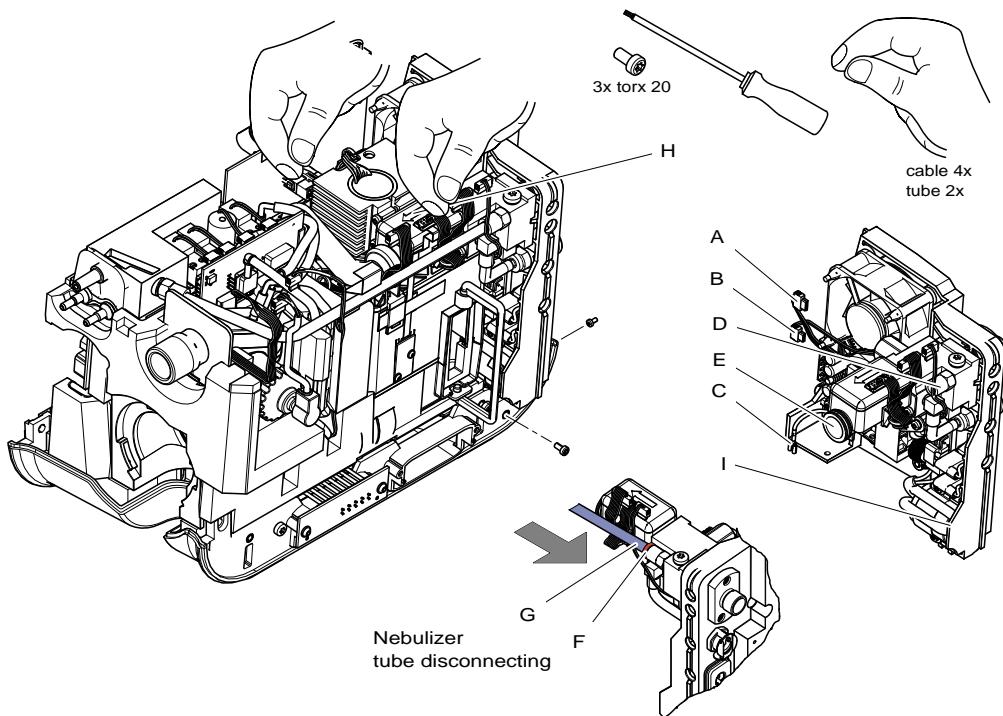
Fan, Power Supply and O2 Mixer Removal/Assembly
